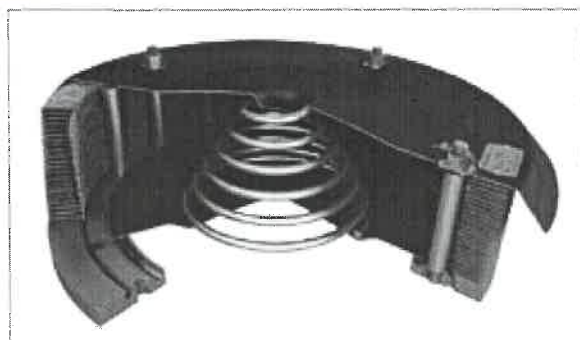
Example of crankcase explosion relief valves type approved in 1999.
